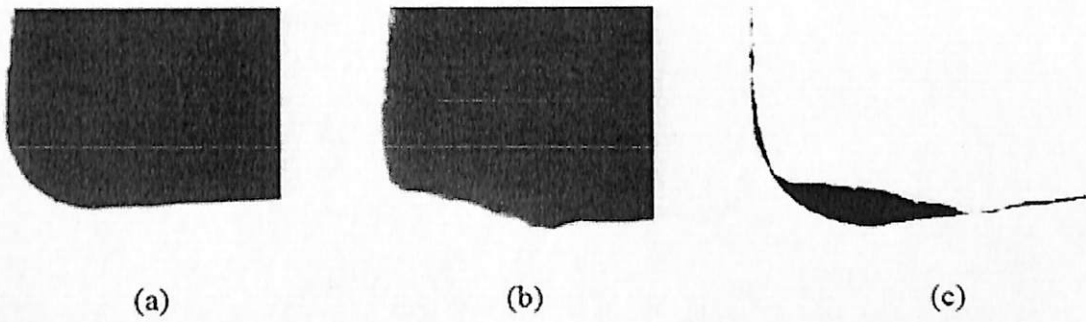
Images of cutting tool tips: (a) Unworn cutting tool tip, (b) worn cutting tool tip after machining, and (c) wear area obtained by subtraction.
